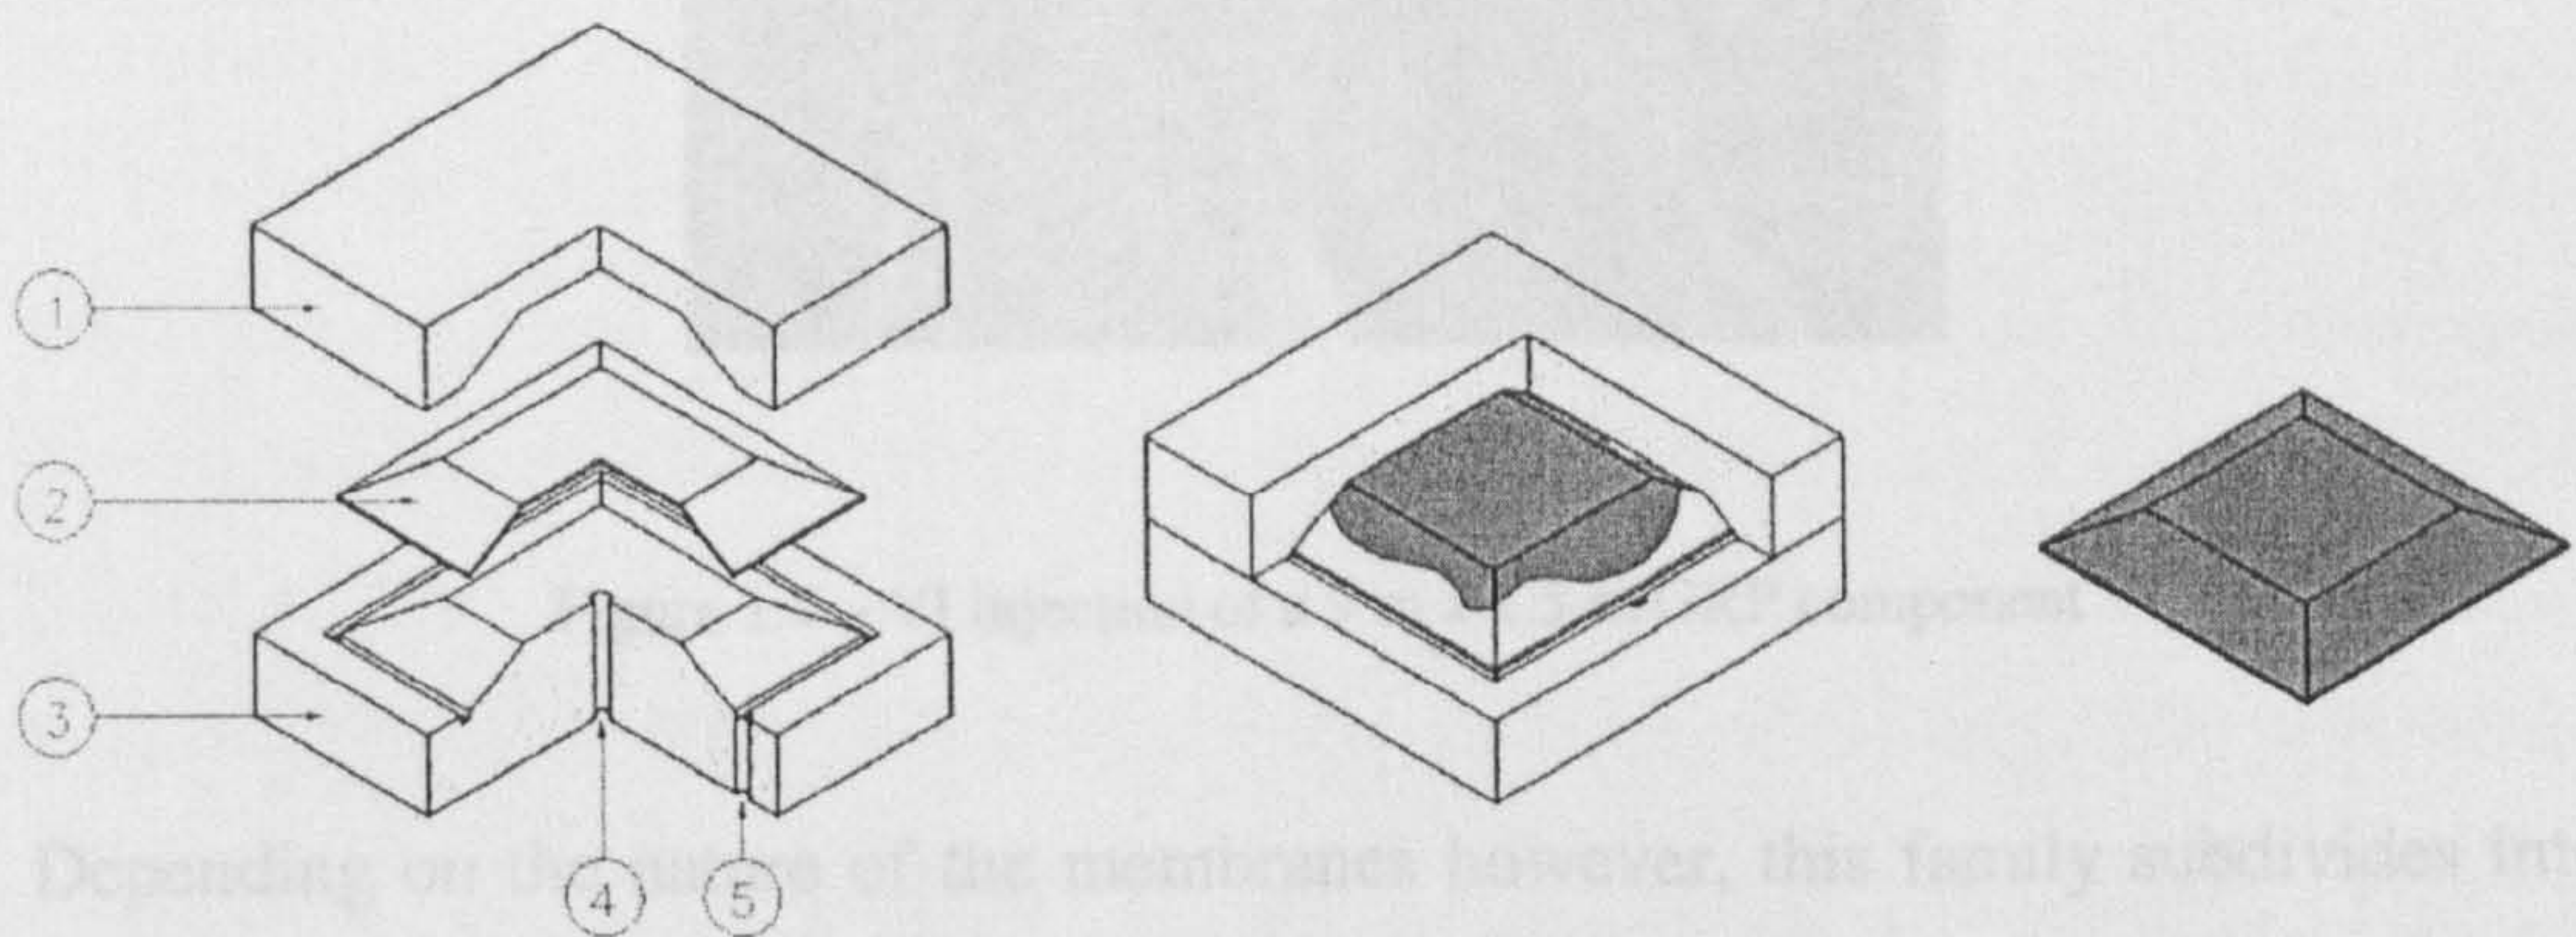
The typical LCM process. Left: Mould components: 1 – Female matched mould, 2 – preform, 3 – male matched mould, 4 – injection gate and 5 – vent. Centre: Resin injection (transfer). Right: Moulded component is removed (after curing)
